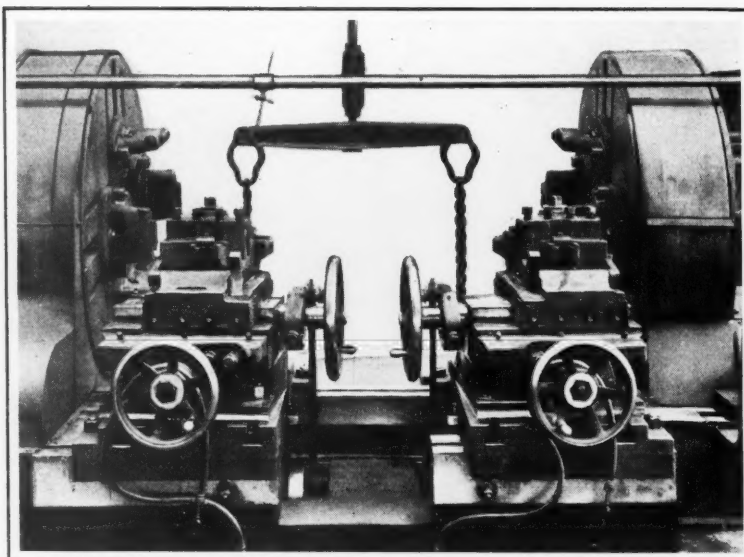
Equipment on Car-wheel Lathe which Permits Chucking Wheel Sets with Either Roller or Plain Journal Bearings
